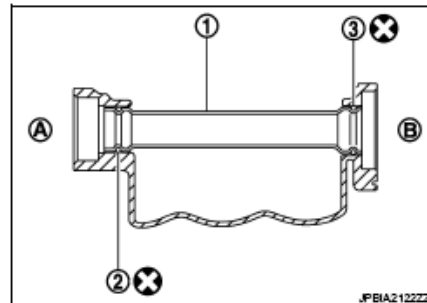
Identifying Axle Pipe To Oil Pan (Upper)
